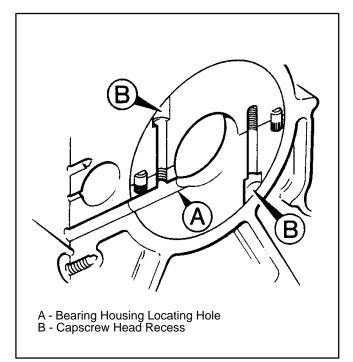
CENTER MAIN BEARING HOUSING AND DOWEL HOLE ALIGNMENT
